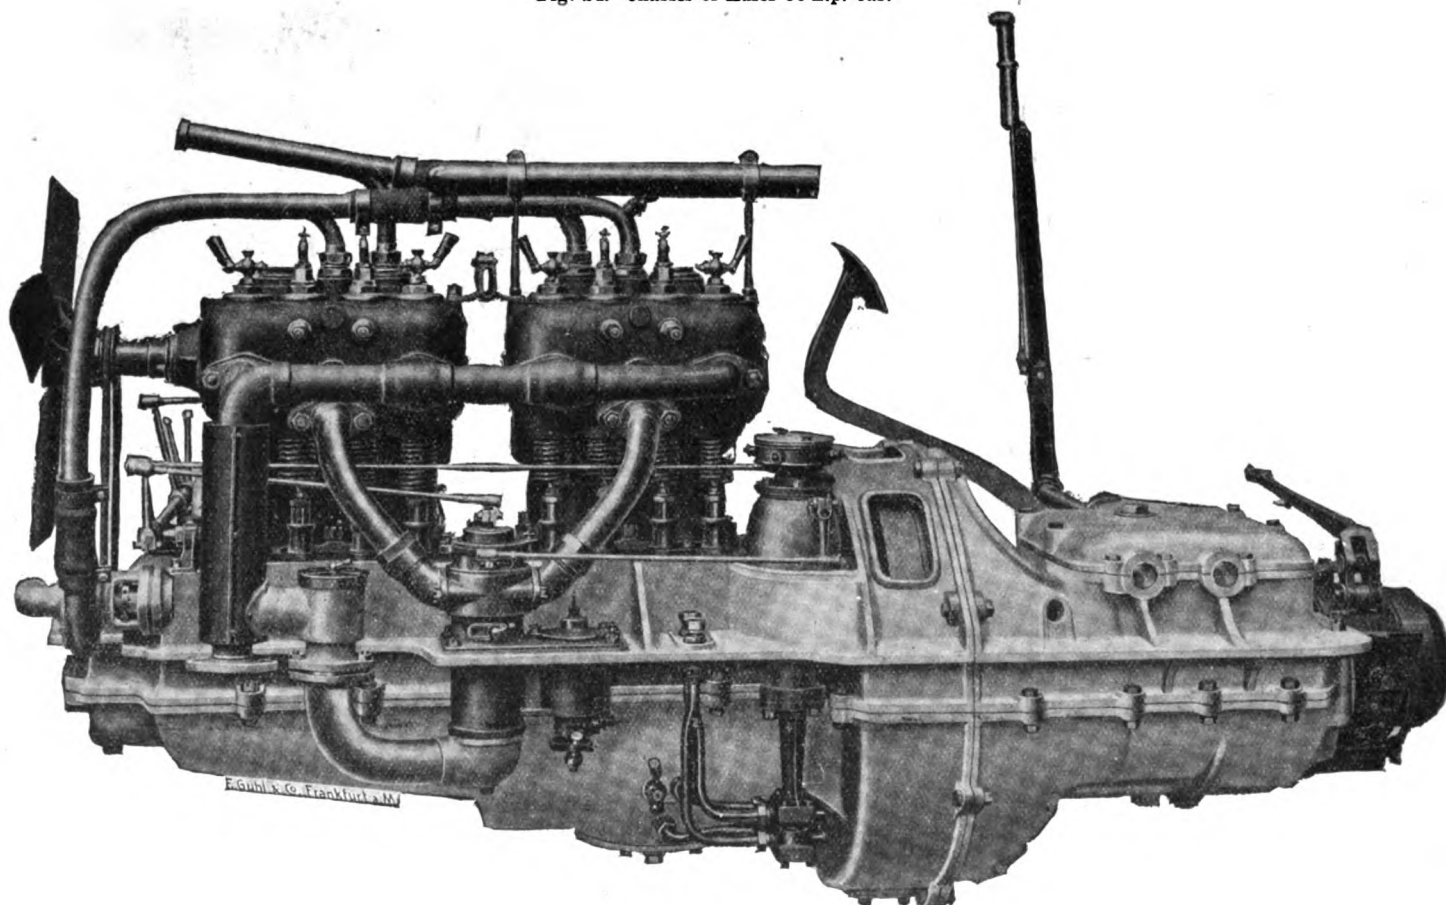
The Engine, Clutch and Gear Box of the Adler 50-h.p. Car.
